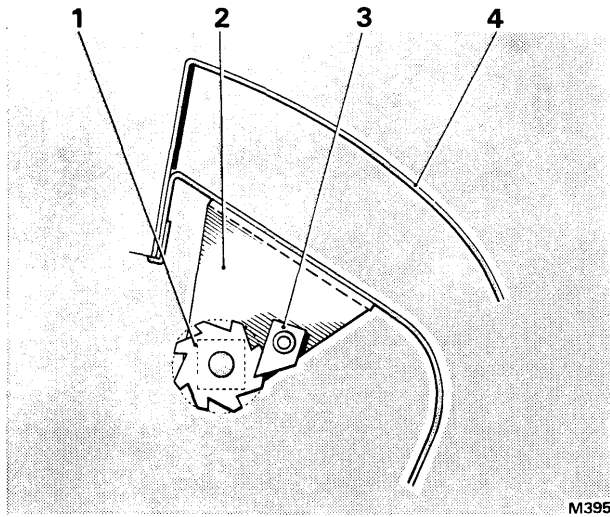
TENSION ROLLER SHOWING THE PAWL ATTACHED TO THE ROLLER BRACKET
